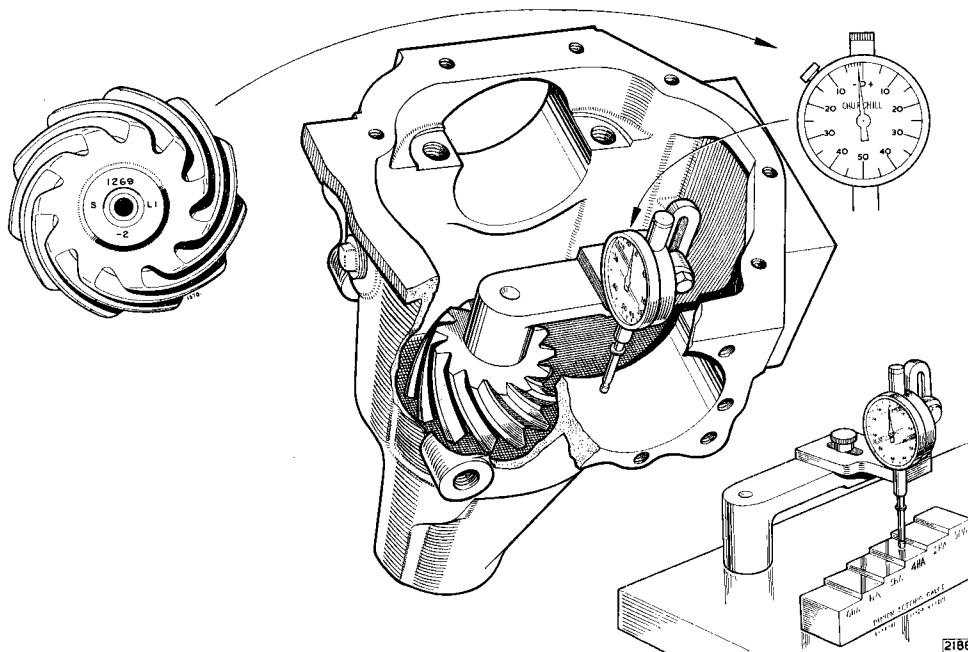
Checking the pinion cone setting using Churchill Tool No. SL.3 PCS. Also illustrated are the pinion setting marks located on the end of the pinion
